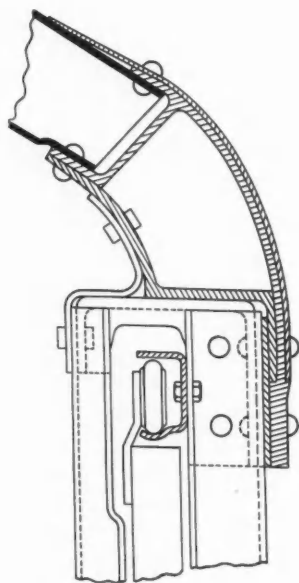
Detail of bus body showing the number of extruded aluminum sections
